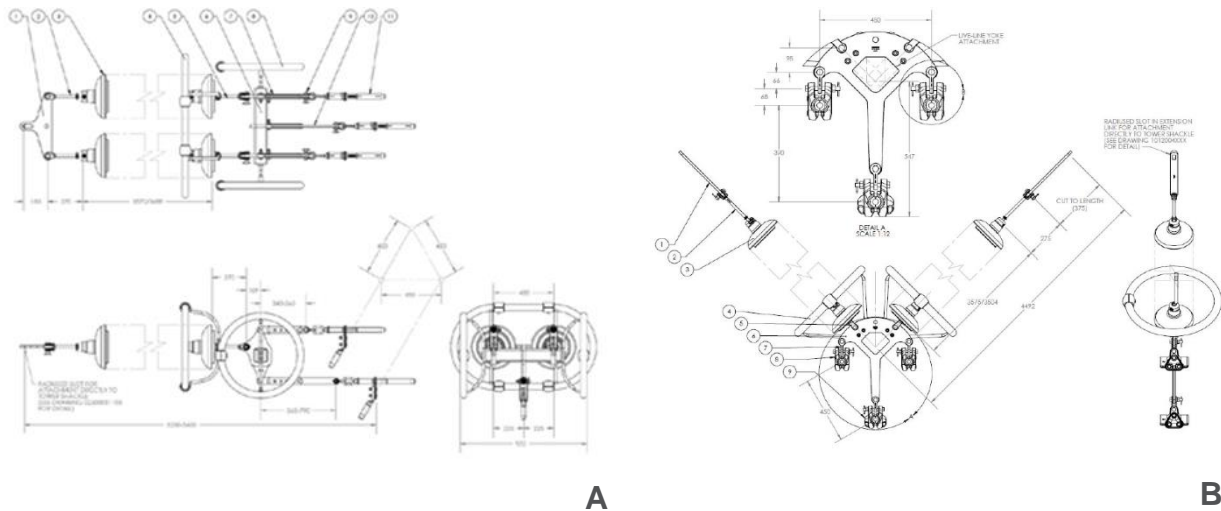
A - Strain Insulator Assembly (3x Tern); B - Suspension Insulator assembly (3x Tern)
